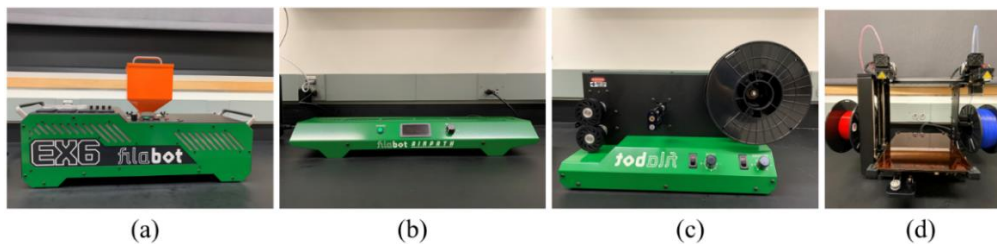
The recycling system that consists of (a) extruder, (b) winding path, and (c) spooler; the 3D printer (d) MakerGear M3-ID
